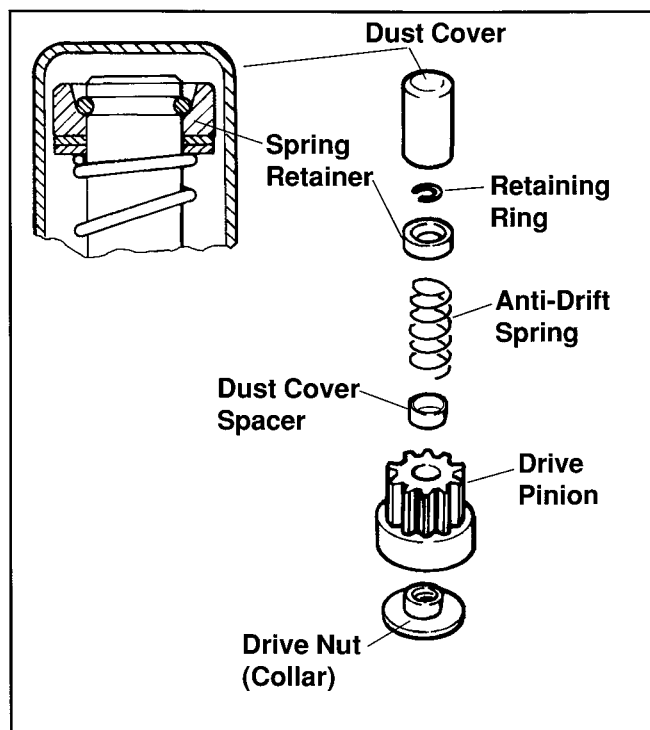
Drive Components, UTE “Bonded” Inertia Drive Starter.
